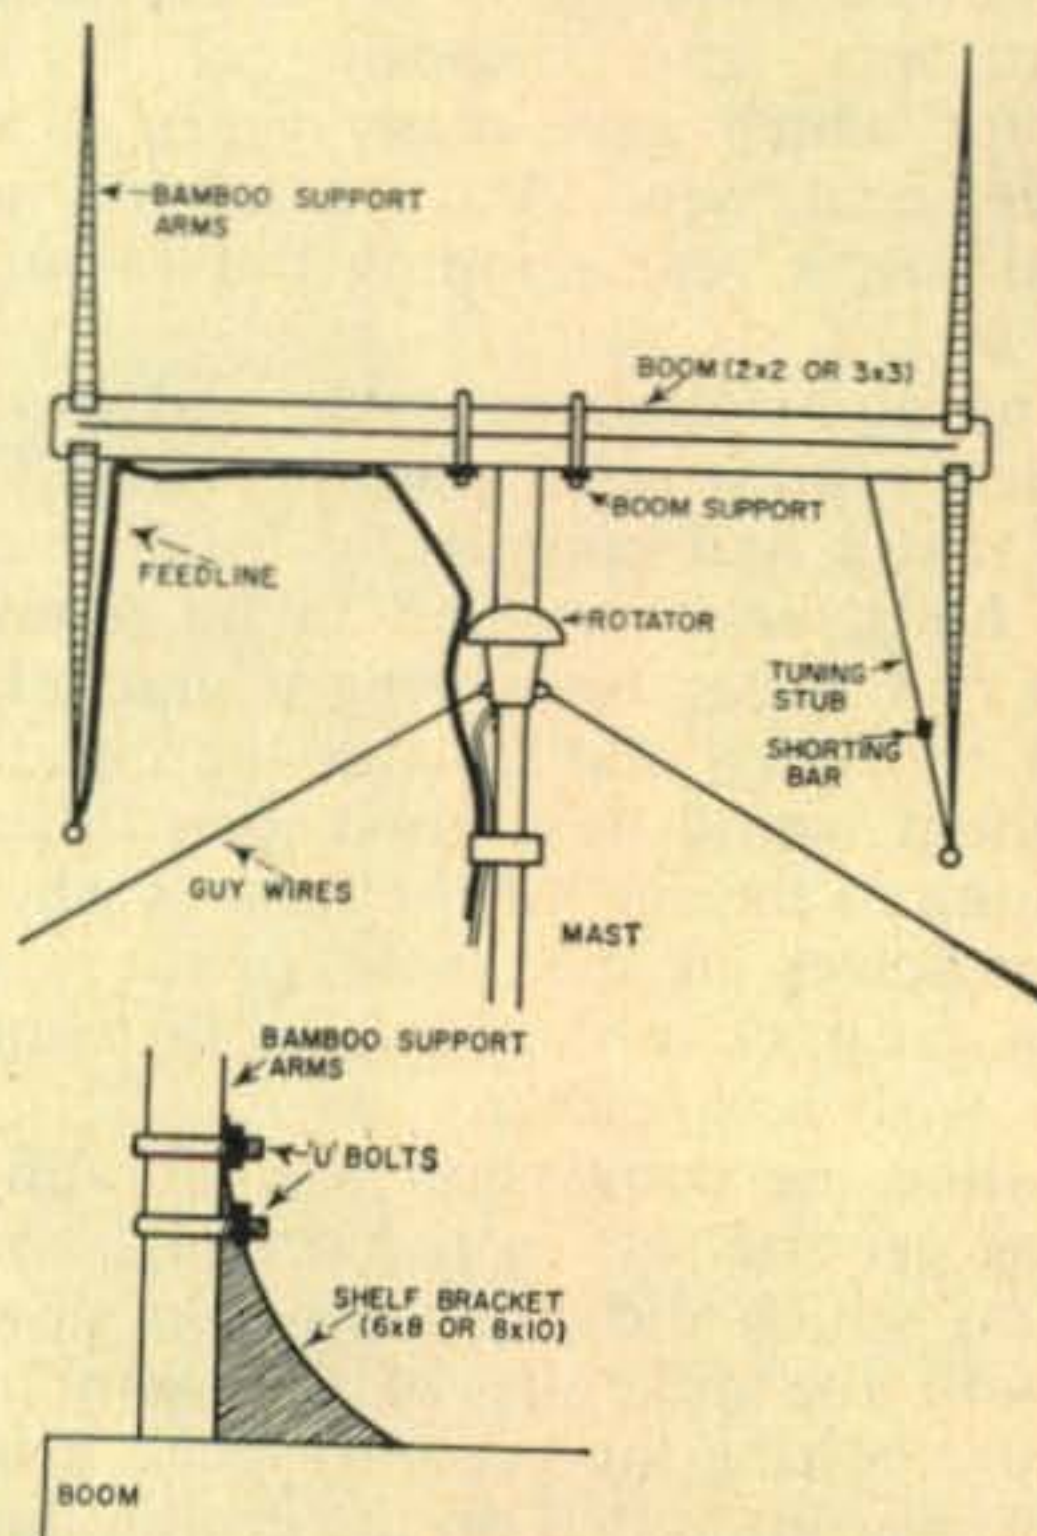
Side view showing boom and details of attaching support arms to boom.
